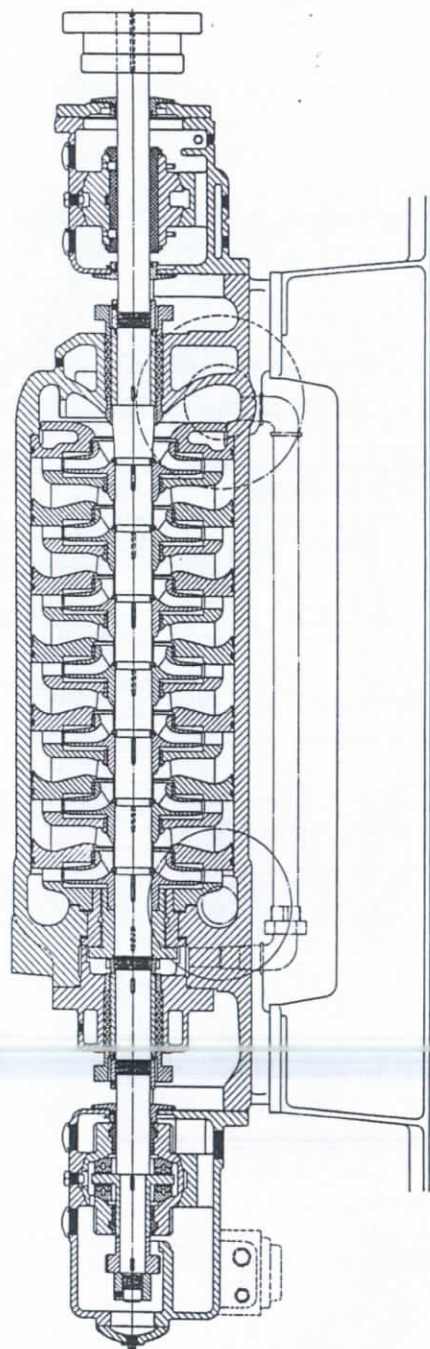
Ingersoll-Rand boiler feed pump for pressures up to 1200 psi.
